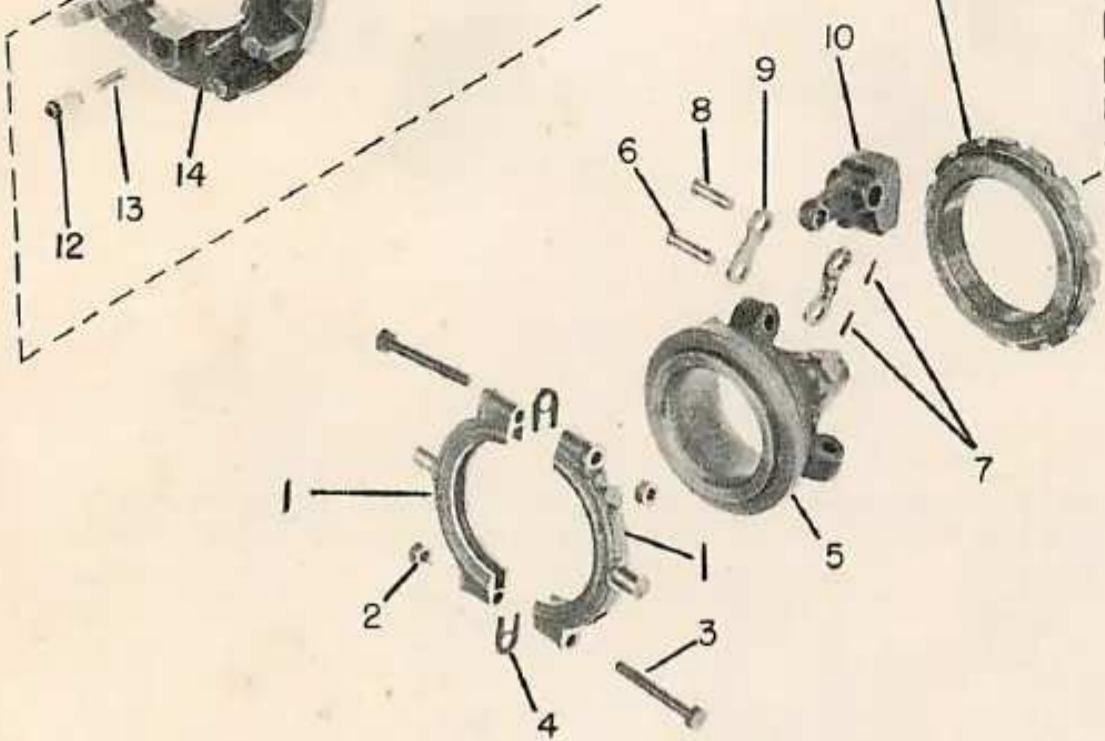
Exploded view of the multiple disc clutch assembly used in dual speed pto. Refer to Fig. O138 for complete pto assembly.
